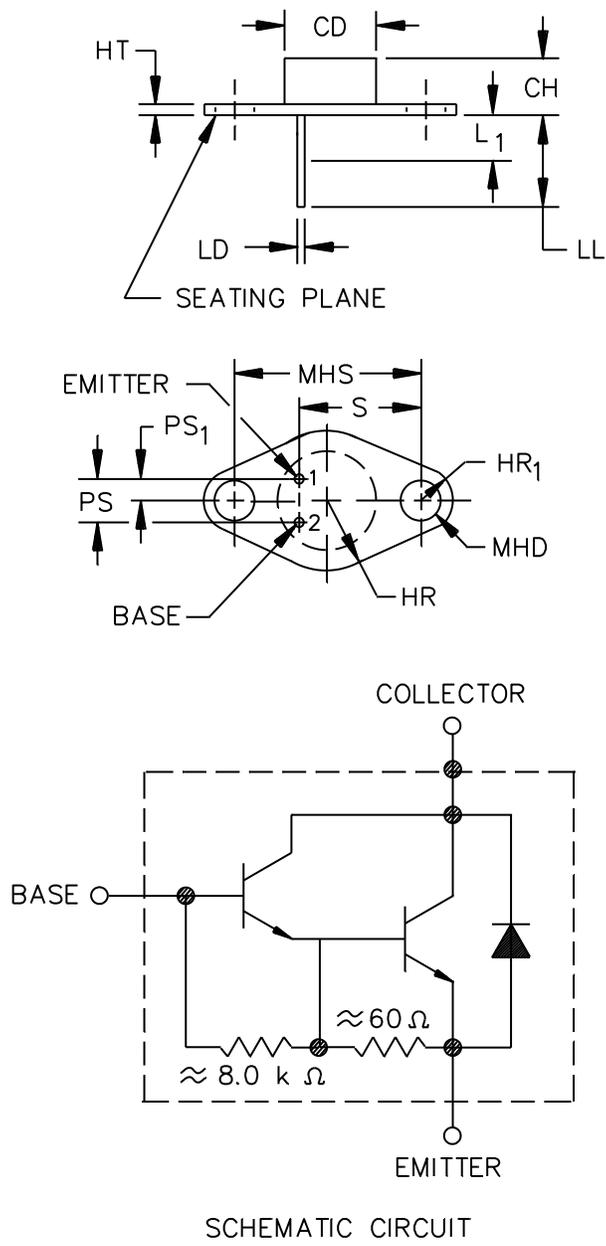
Physical dimensions and schematic (TO-213AA, formerly TO-66).
